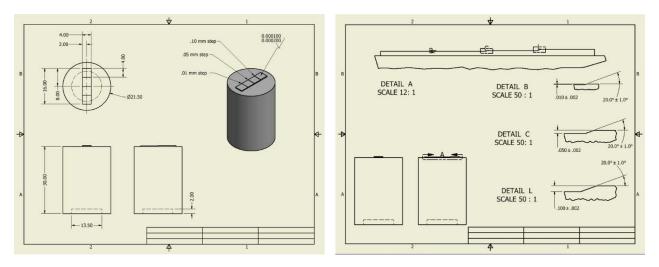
Engineering drawings for the prototype design of the Z axis scale and linearity artifact
